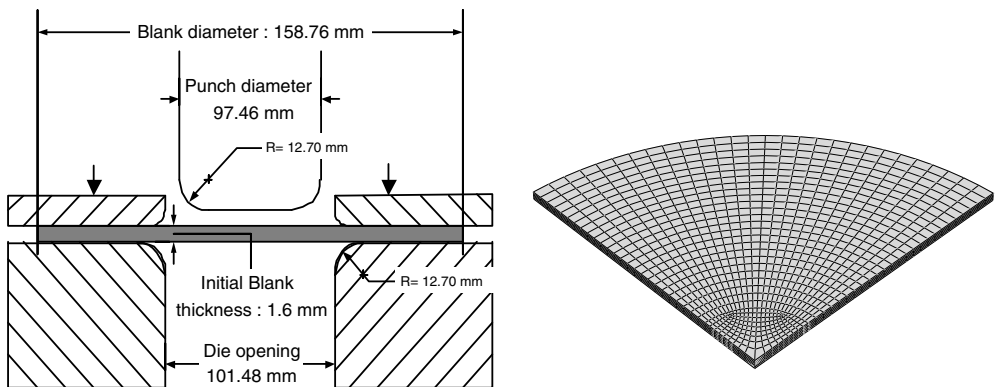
Geometrical setting and tool dimensions for the drawing with cylindrical punch simulation (left), and typical mesh used on the blank (right).
